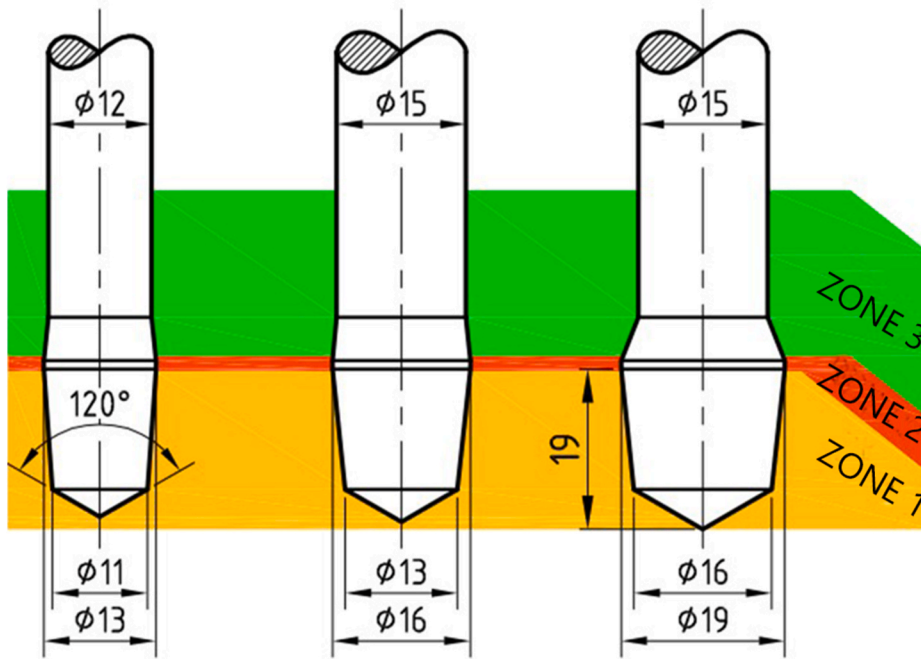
Series of different sized through punches used to manufacture seamless couplings.
